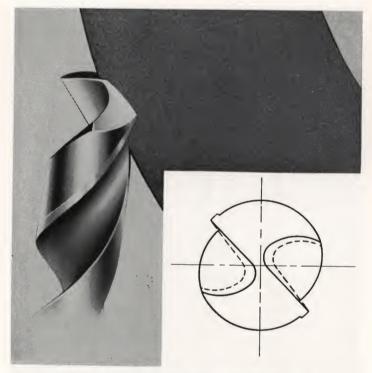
Point-thinning by grinding flute on thin wheel dressed to a radius. For larger drills.
